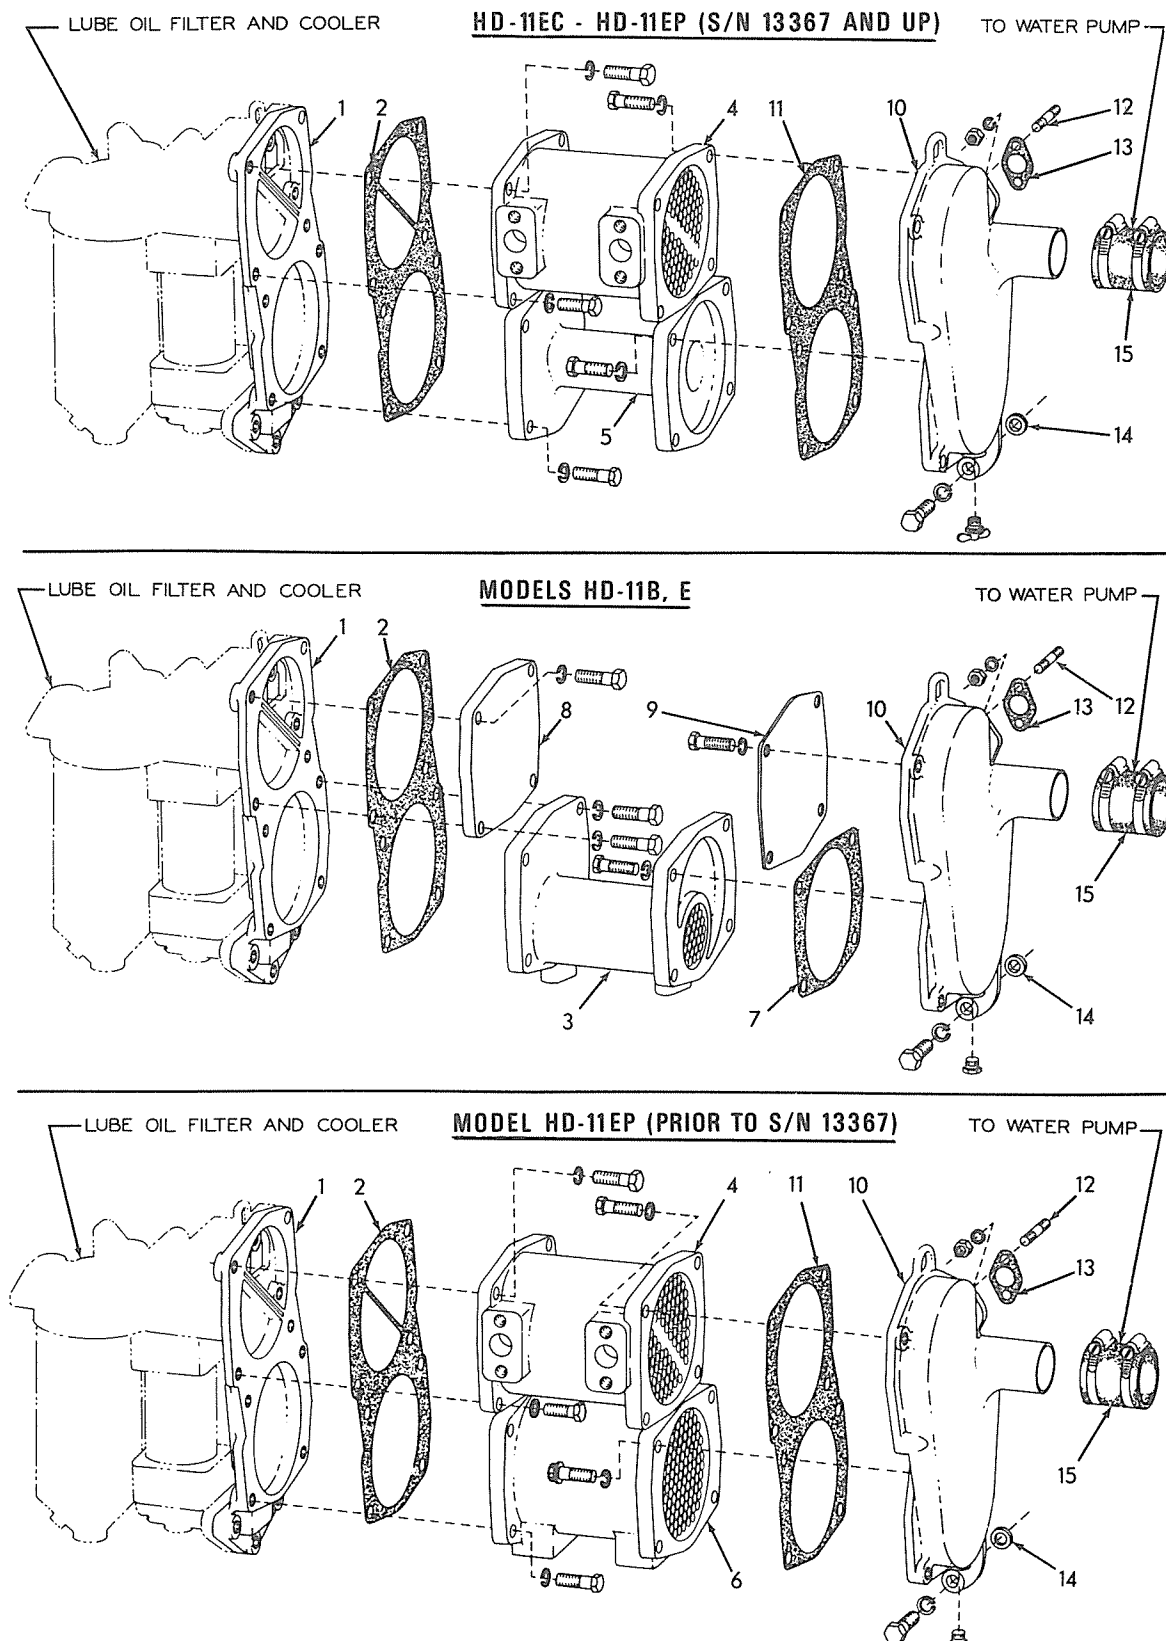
Transmission, Torque Converter, and/or Engine Clutch Oil Cooler Details (Track-Type Tractors) (T-41945)
